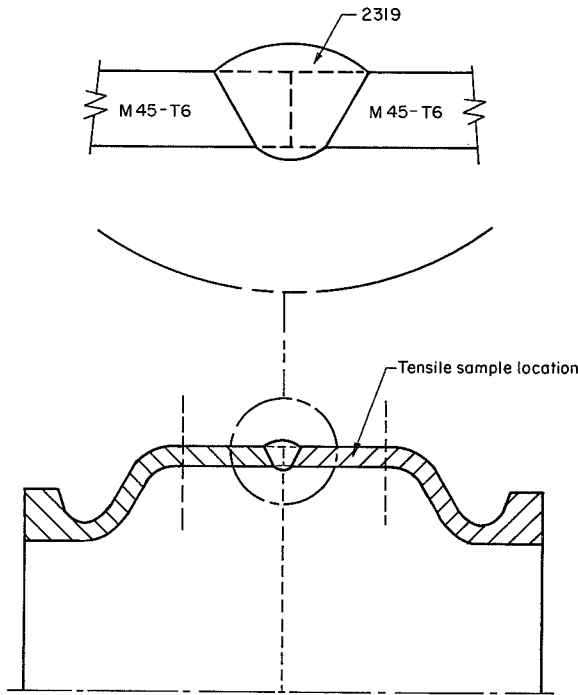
Weld joint assembly of M-45-T6 castings (ref. 12).
